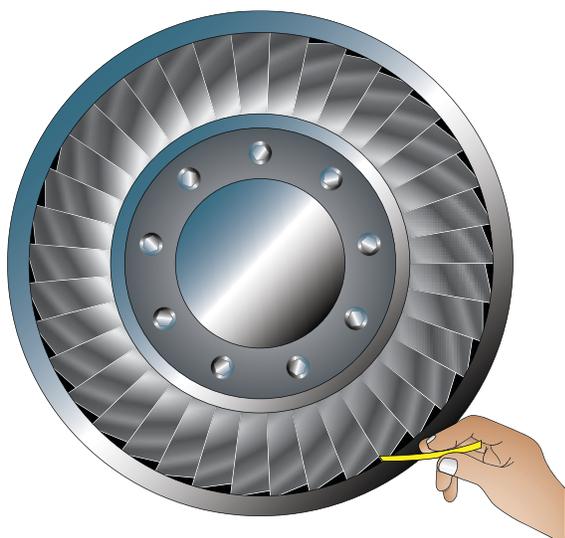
Measuring the turbine blades to shroud (tip) clearances.
